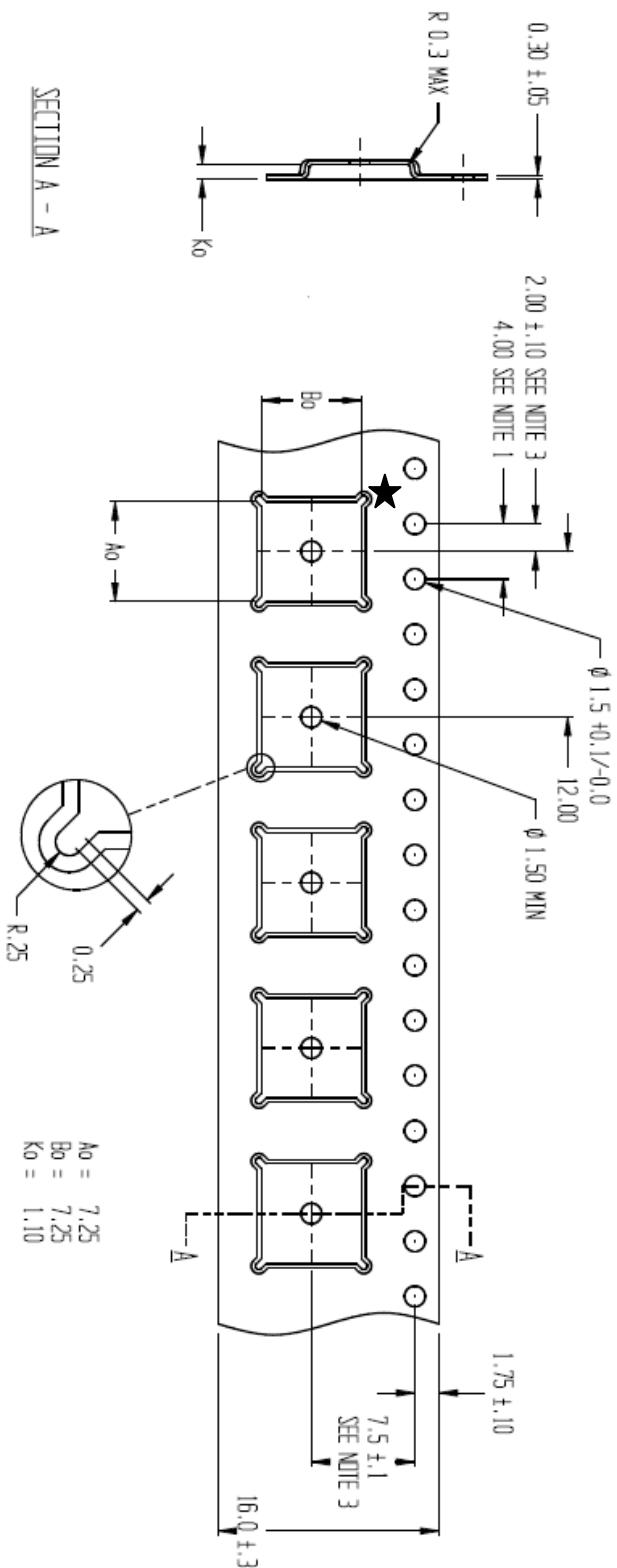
VNC2 – QFN-32, FT311D-QFN Carrier Tape Dimensions
